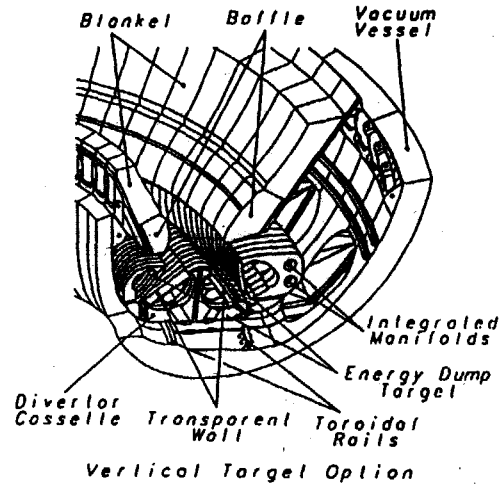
Views of Design, Assembly and Maintenance for the ITER Blanket [35]
